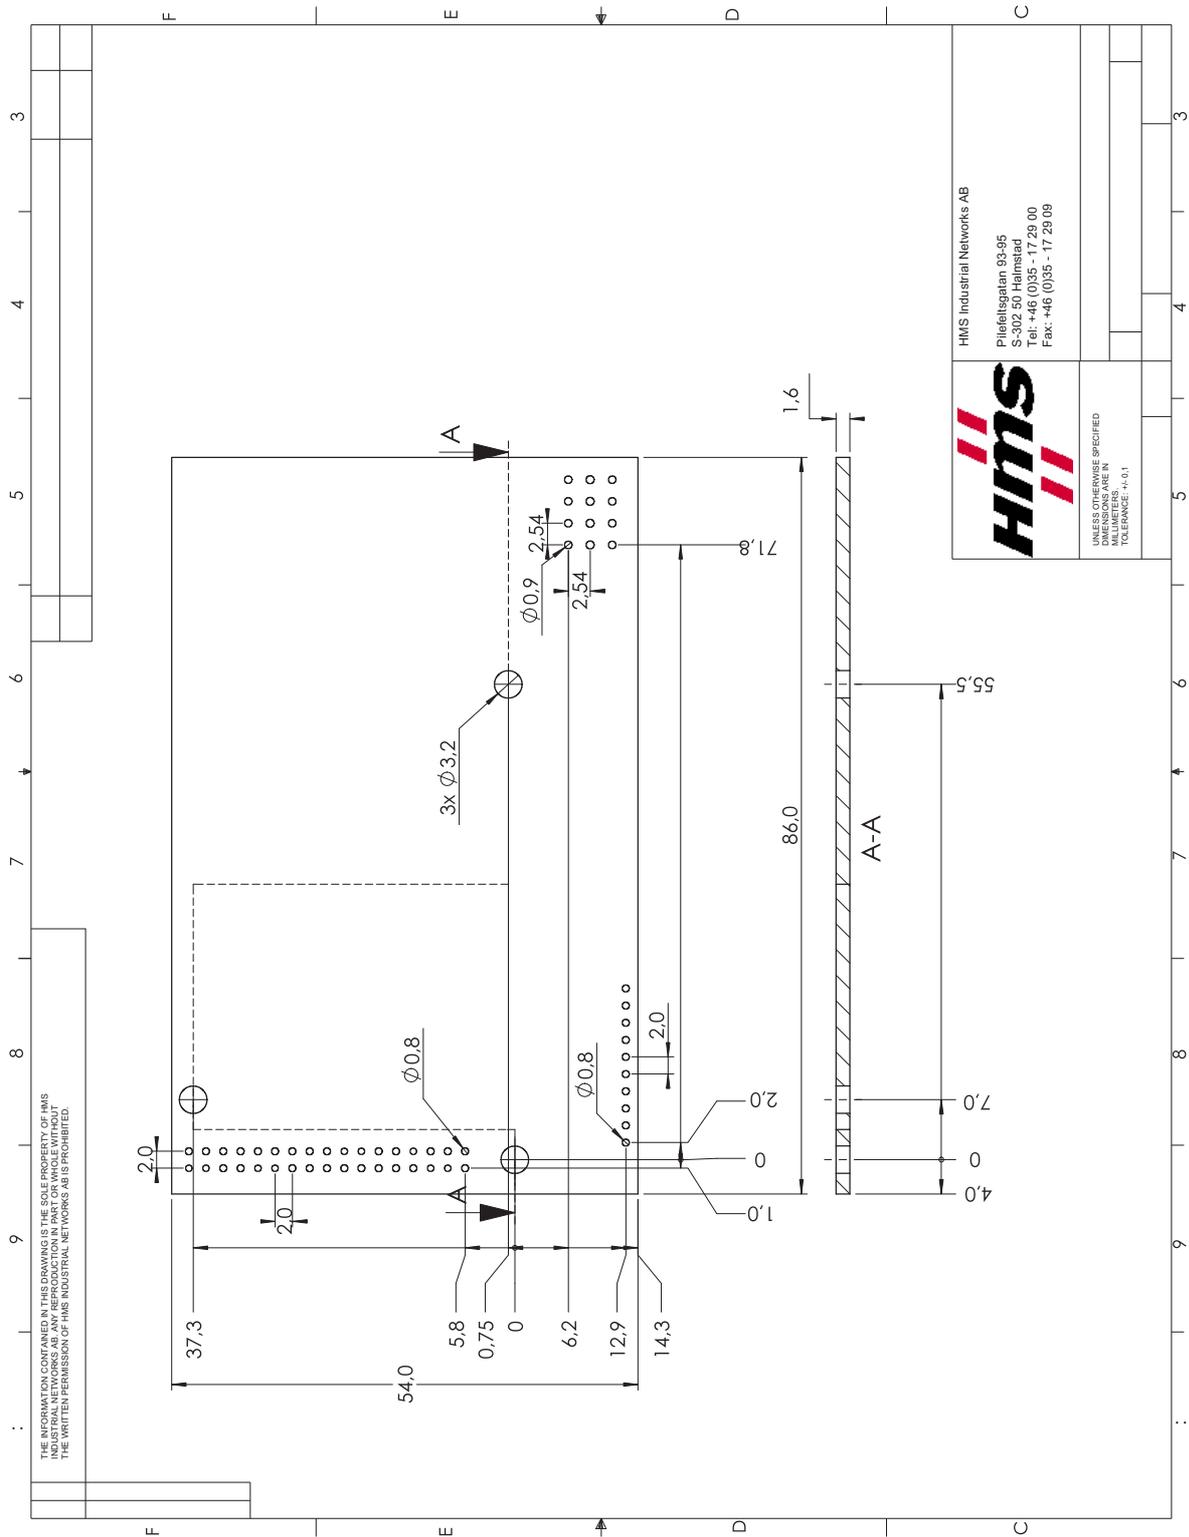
AnyBus-S Modbus Plus Angled PCB view
